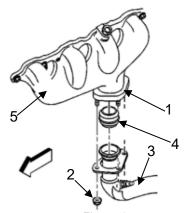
Y-Pipe Assembly (3), Y-Pipe Gasket (4), Exhaust Manifold Heat Shield (5), Exhaust Manifold (1), and Nut (2)
